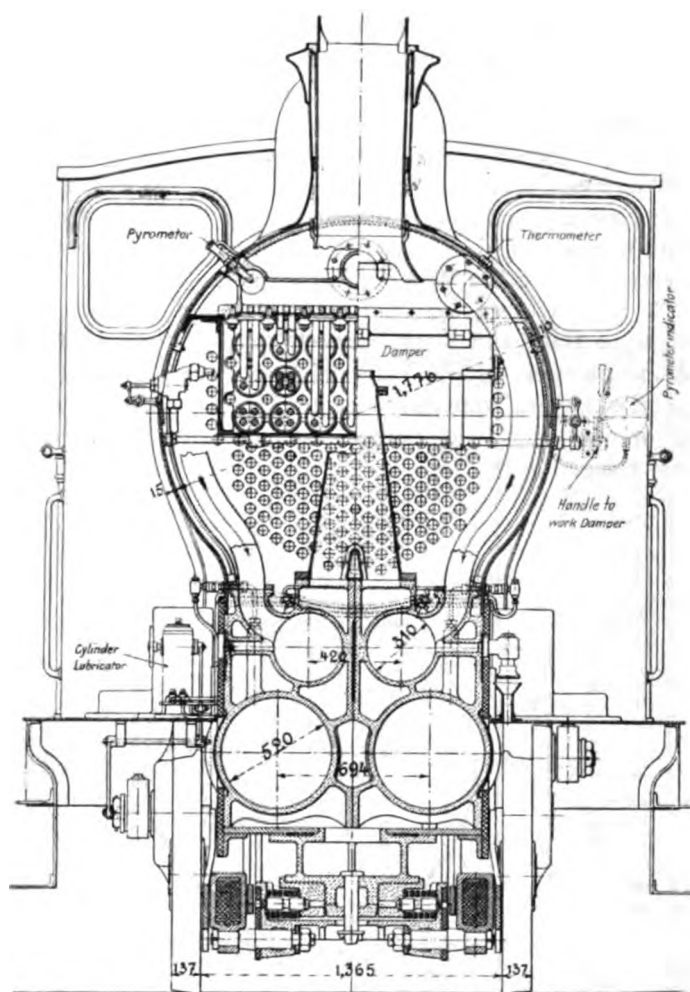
Six Wheels Coupled Locomotive: Belgian State Railway.
